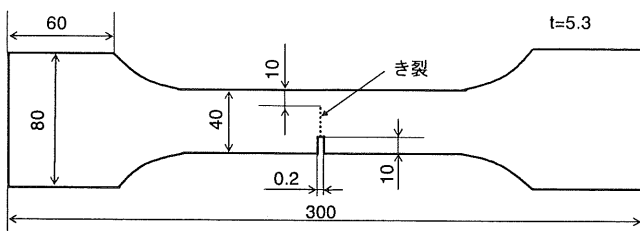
SUS304 specimen with a fatigue crack.
